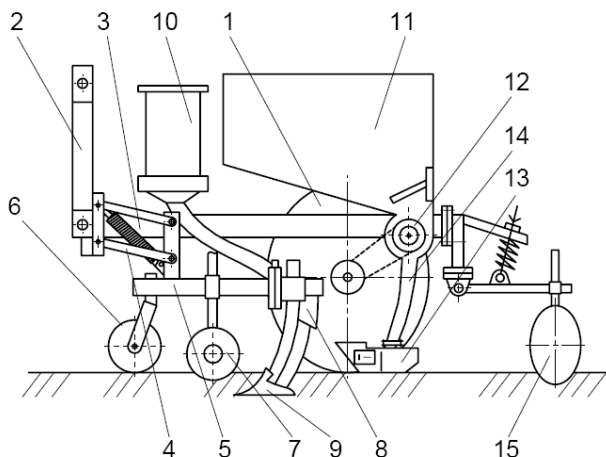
Design and technological diagram of a combined potato planter: 1–support-drive wheel; 2–suspension; 3–frame; 4–parallelogram hanger mechanism; 5–beam; 6–support wheel; 7–flat disk; 8–fertilizer conveyor; 9–occipital tooth; 10–fertilizer apparatus; 11–bunker; 12–disk measuring device; 13–opener; 14–seed conductor; 15–spherical disc soil digger.
